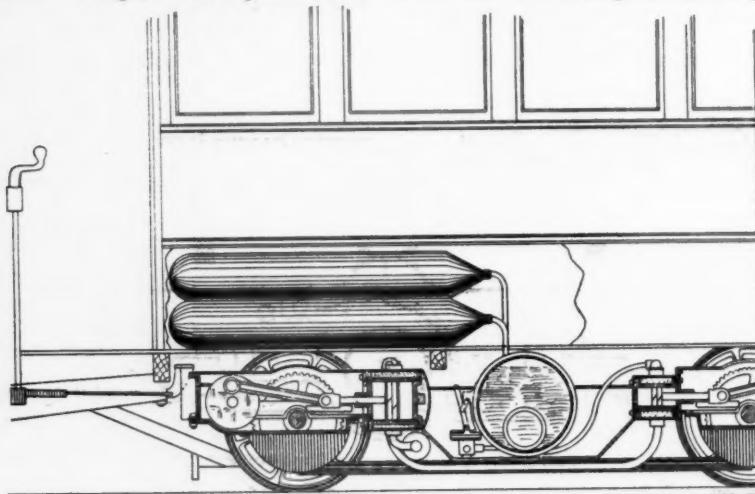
SECTIONAL VIEW OF MOTOR CAR.
